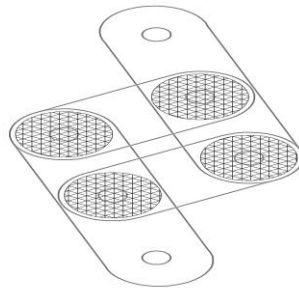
Schematic View of Protected Friction Plates in the Rotational Friction Damper
